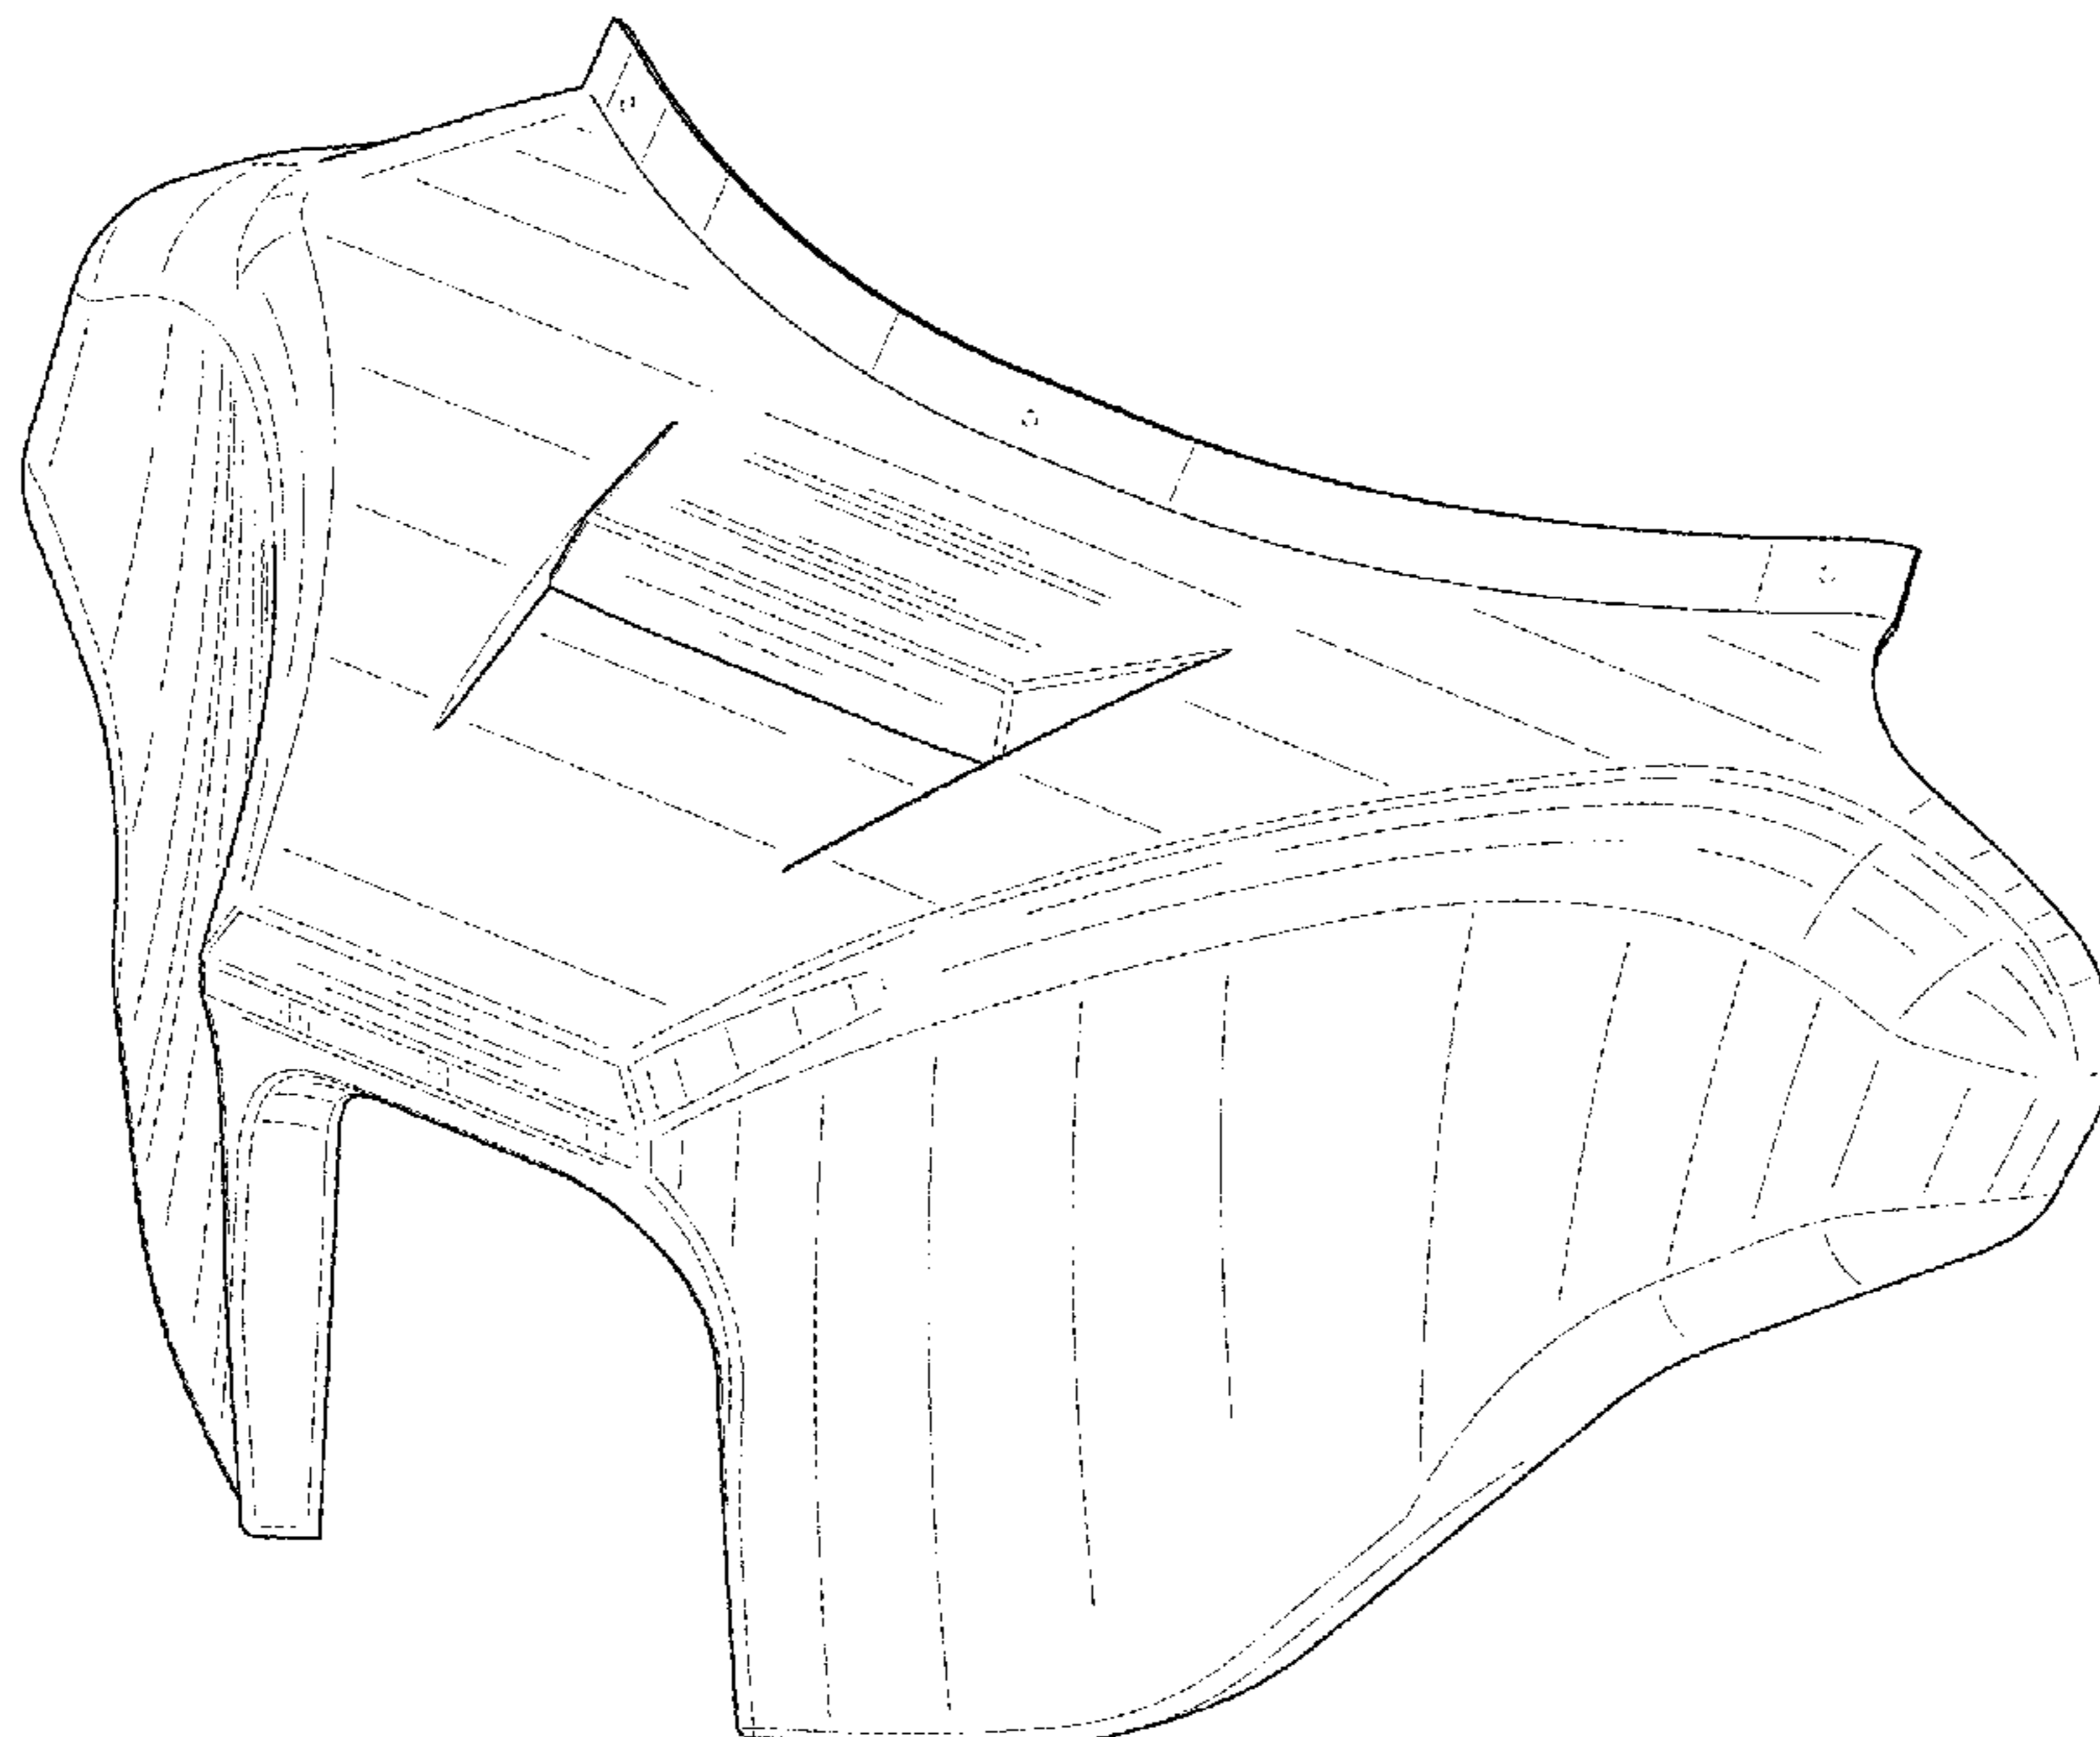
is a front perspective view of the front fairing for a motorcycle;
